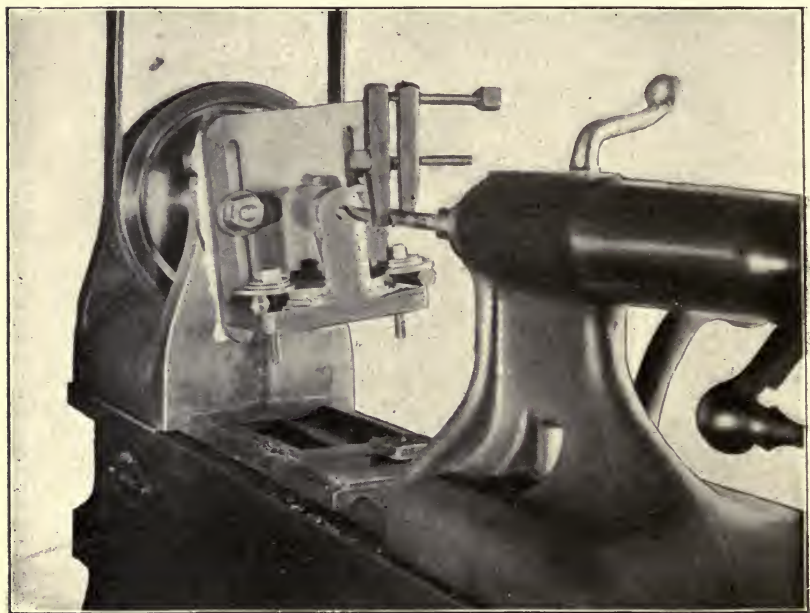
DRILLING PISTON CASTING FOR PISTON PIN.
